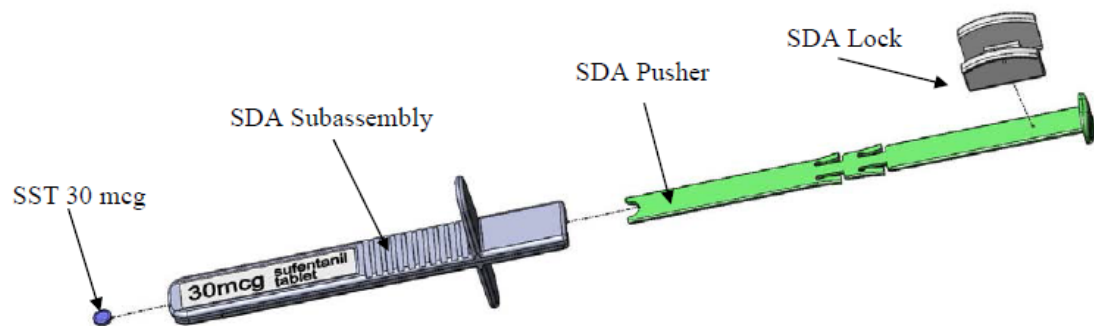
P.7.2: 2 SDA Exploded View with Components
